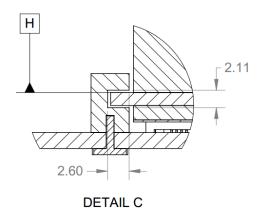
Small Form Factor Baseboard Chassis CTF Dimensions (Rail Guide Detail) - Detail C
